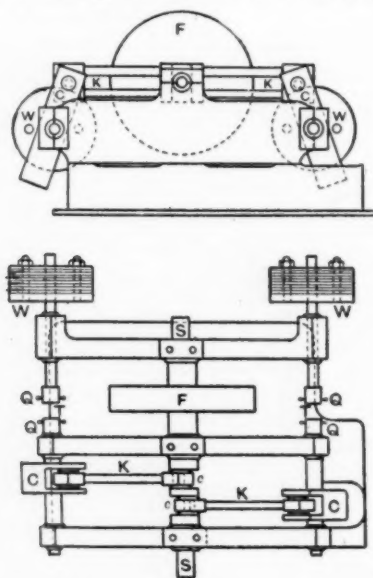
STROMEIER'S MACHINE FOR MEASURING ALTERNATING TORSION
